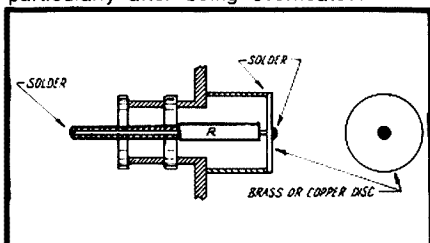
Dummy antenna made by mounting a composition resistor in a PL-259 coaxial plug. Only the inner portion of the plug is shown, the cap screws on after the assembly is completed.
